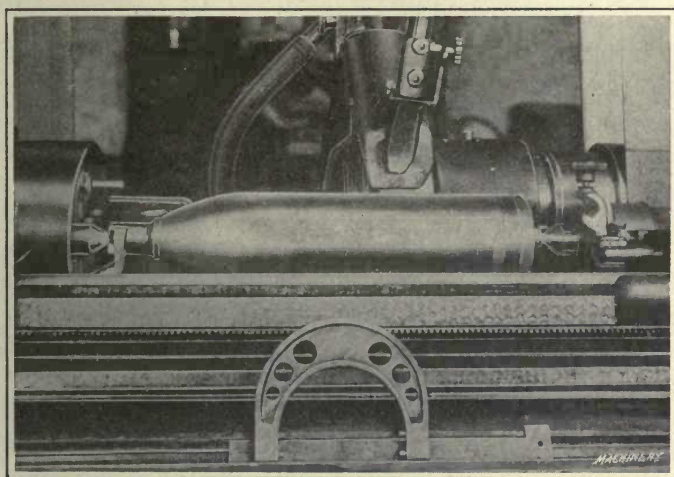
Grinding Body of Shell on Norton Plain Grinding Machine
